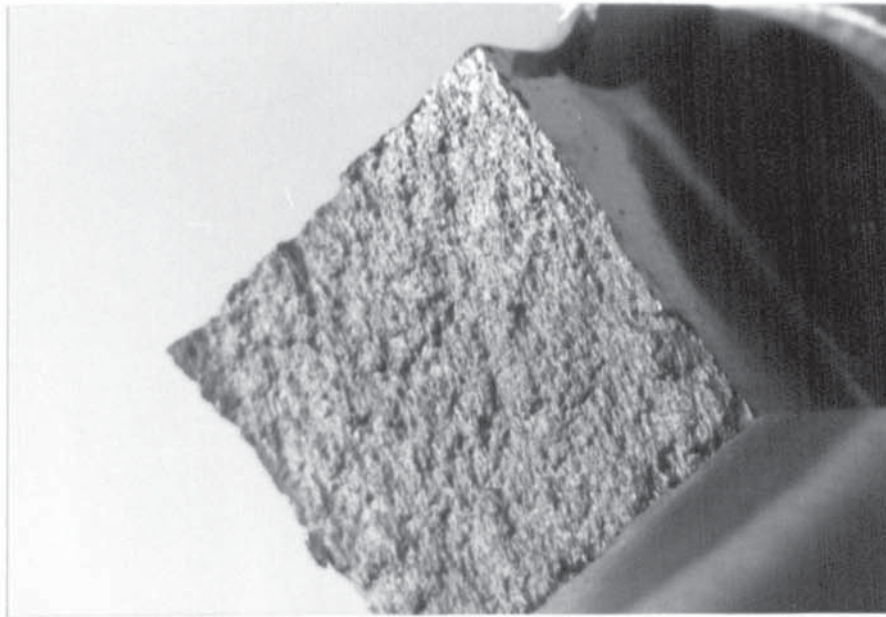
Corner-Crack Specimen Fatigued to Final Fracture.
